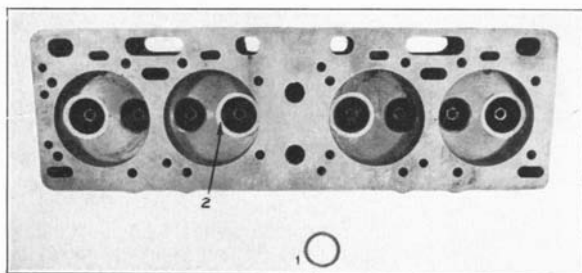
Cylinder head with valve insert seats for exhaust valves
